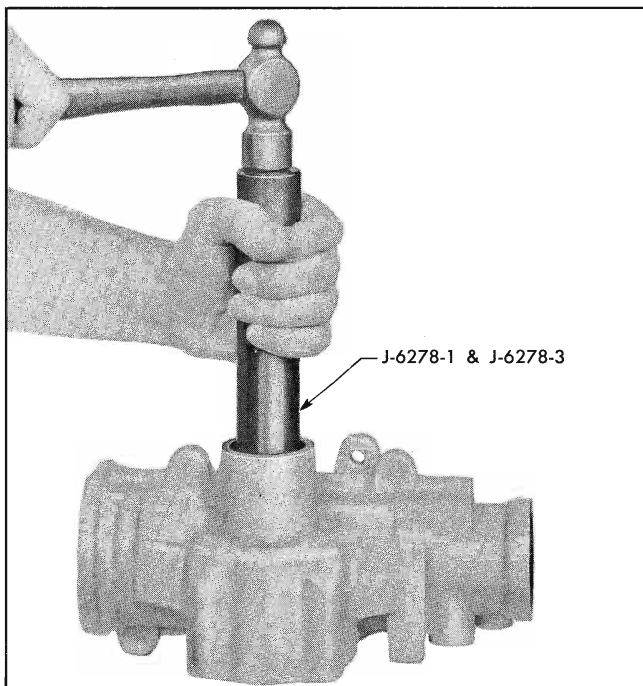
A-18 Removing Pitman Shaft Needle Bearing
